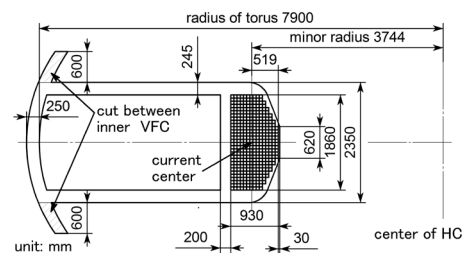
Cross section of the helical coil perpendicular to the coil winding direction.
